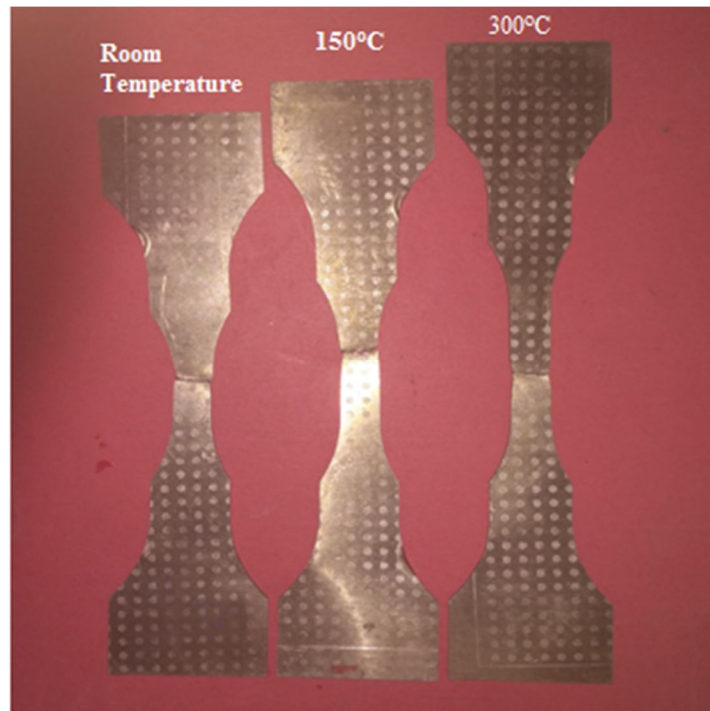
Aluminium 6061-T6 (2mm) specimens for tensile testing at elevated temperatures.
